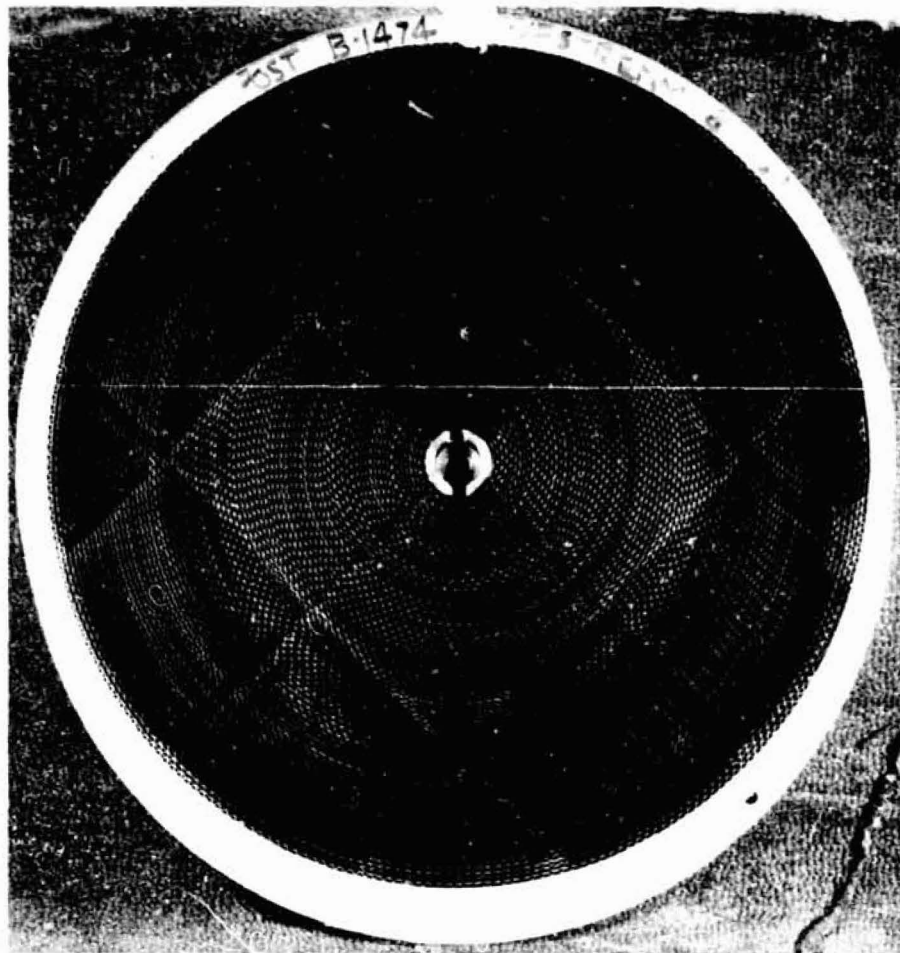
Spiral-Wound, Crimped Stainless-Steel Ribbon Core Element, 30.5-cm Diameter by 20.3-cm Length, Posttest Upstream Side
